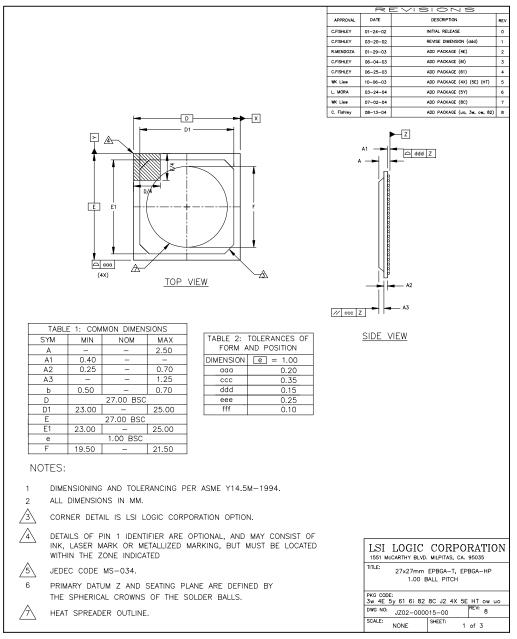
JZ02-000015-00 (5Y) Mechanical Drawing (Sheet 1 of 3)
